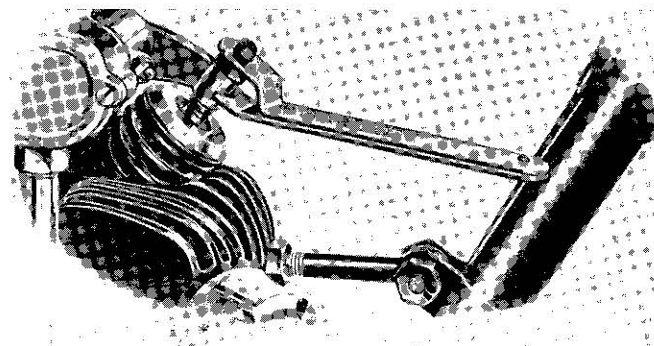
THE A.J.S. PUSH-ROD EXTRACTOR (1932-3)
